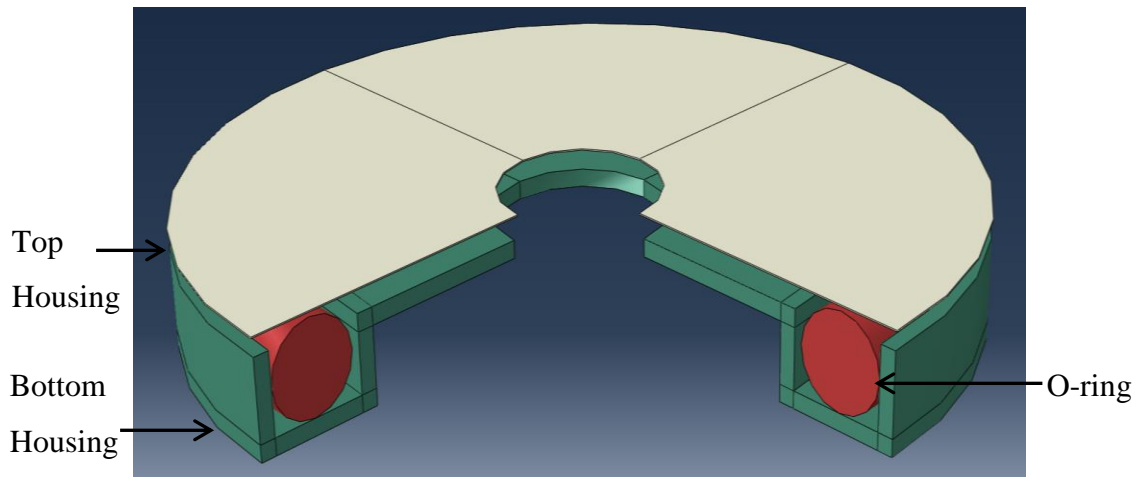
A 3D model of an O-ring contained in its housing gland surfaces.
